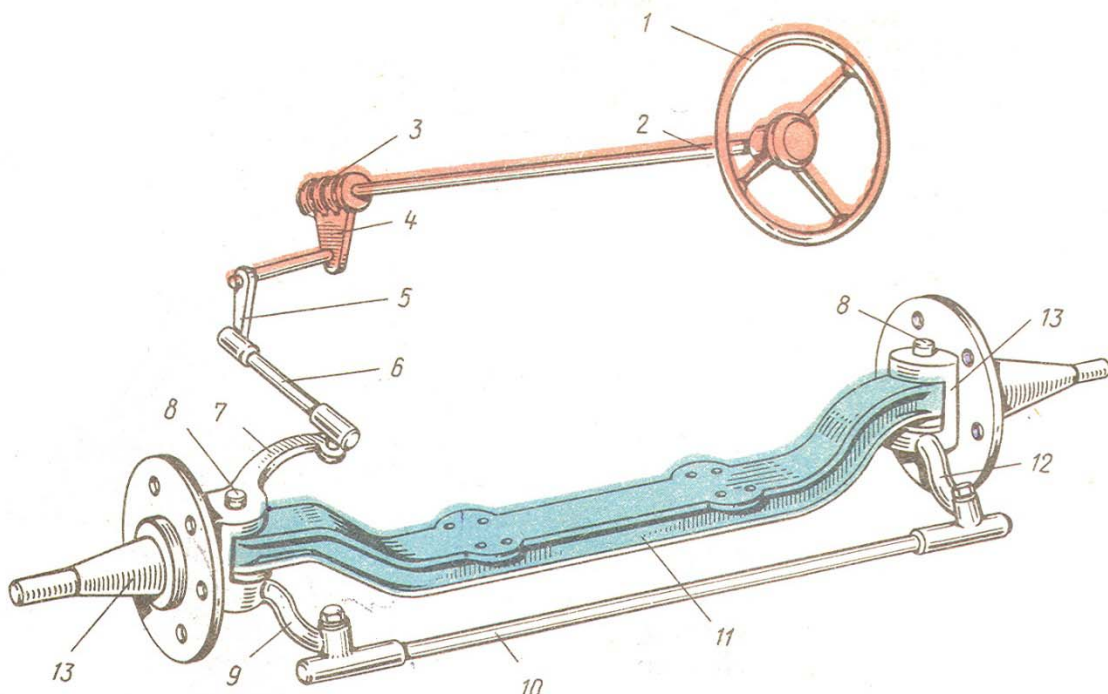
Steering scheme: 1 - steering wheel;
